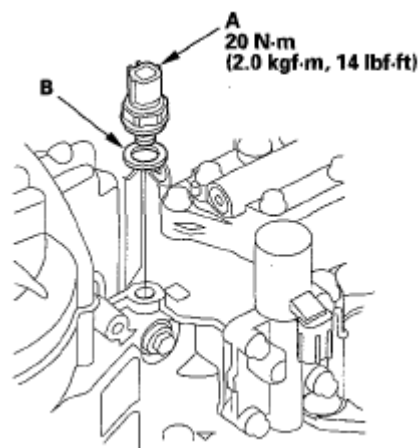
Identifying 4Th Clutch Transmission Fluid Pressure Switch And Sealing Washer With Torque Specificaiton
